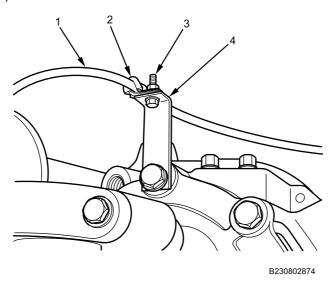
Front Axle Shift Cylinder Air Line Bracket.
